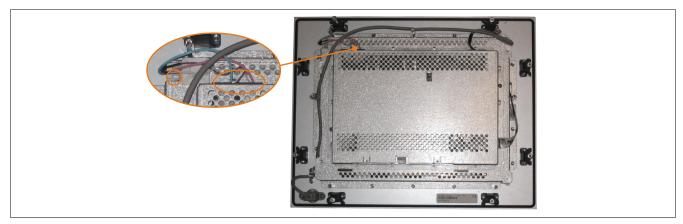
12.1" Automation Panels - Unscrewing and disconnecting
